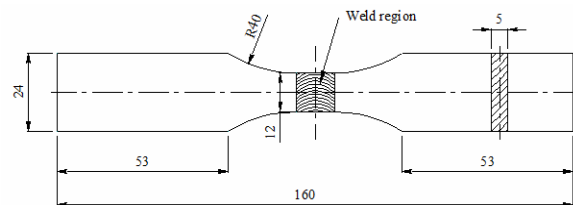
Details of the FSW fatigue sample showing the nominal dimensions.
